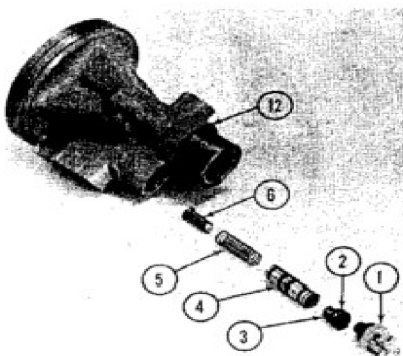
Exploded view of Hydramotor housing and blocking valve components. Blocking valve can be removed without disassembly of Hydramotor.
